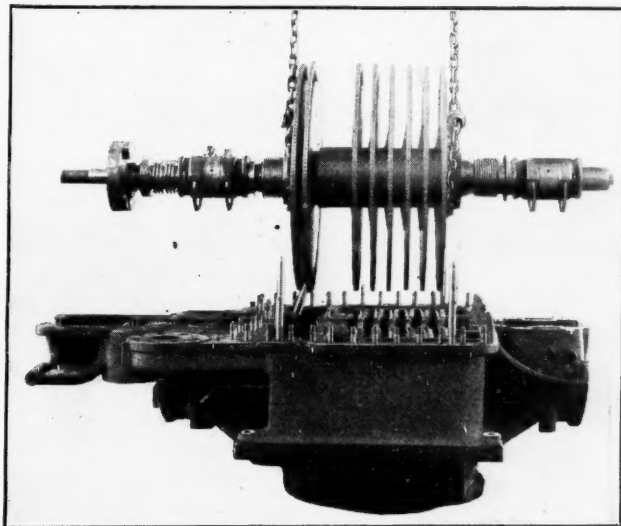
COMPOSITE DESIGN WITH ROTOR LIFTED OUT OF CASING
